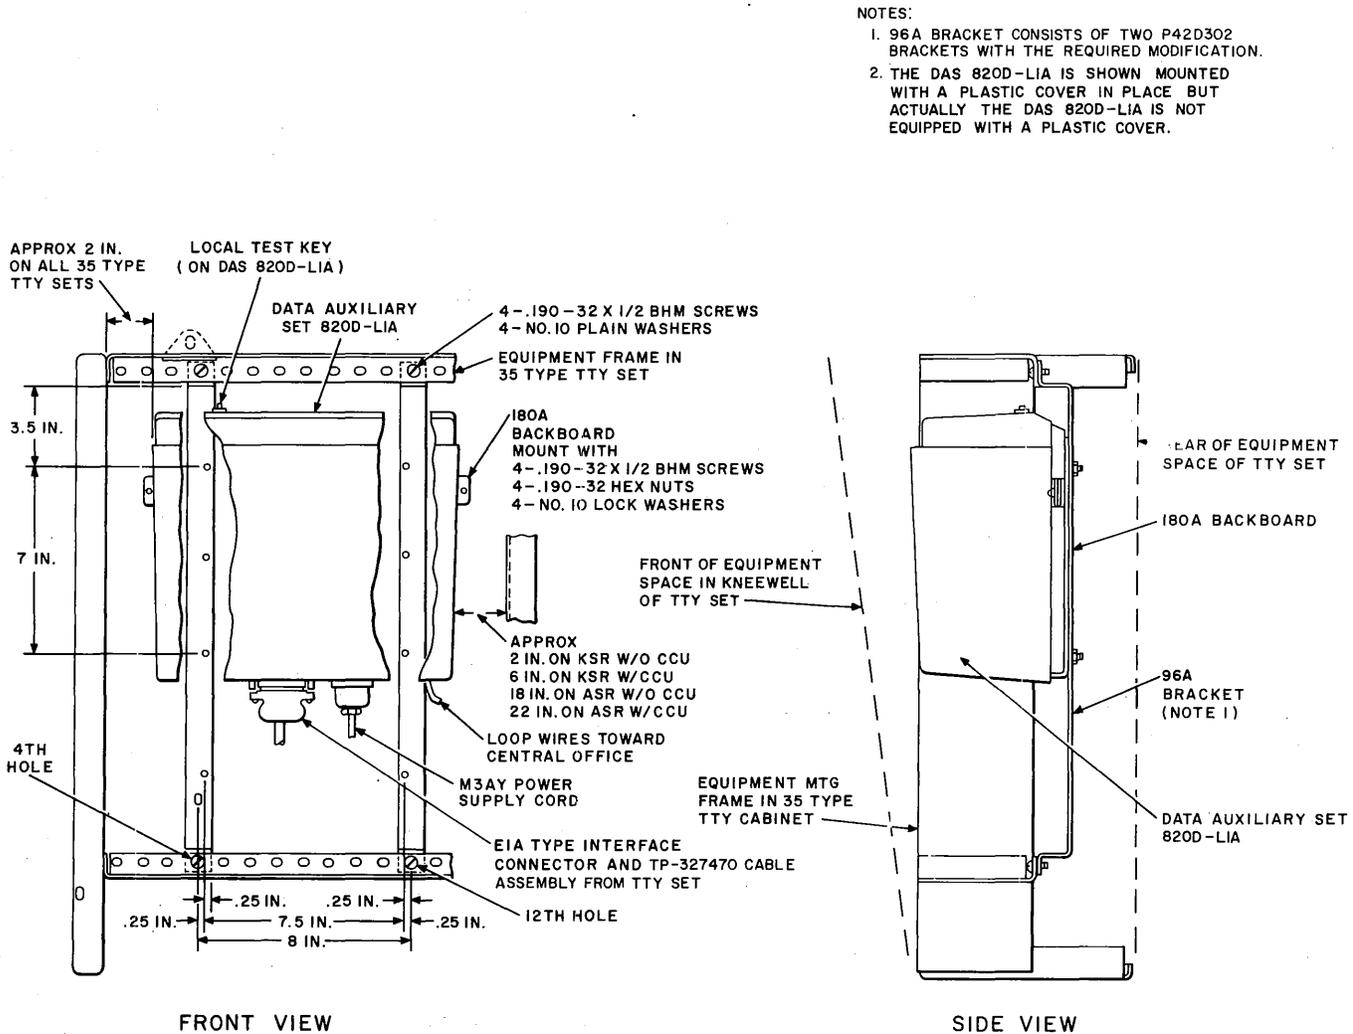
Layout of Model 35 Teletypewriter With Data Auxiliary Set 820D-L1A
